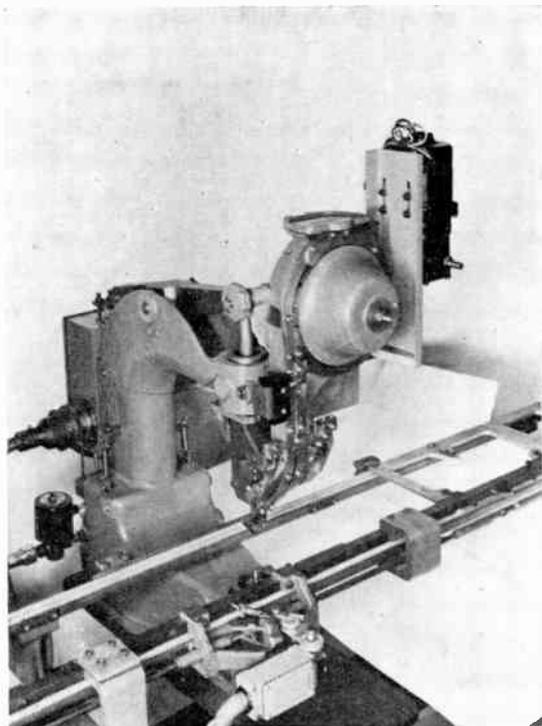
A Tagging Machine positioned on the Conveyor showing the feed hopper and driving motor.
